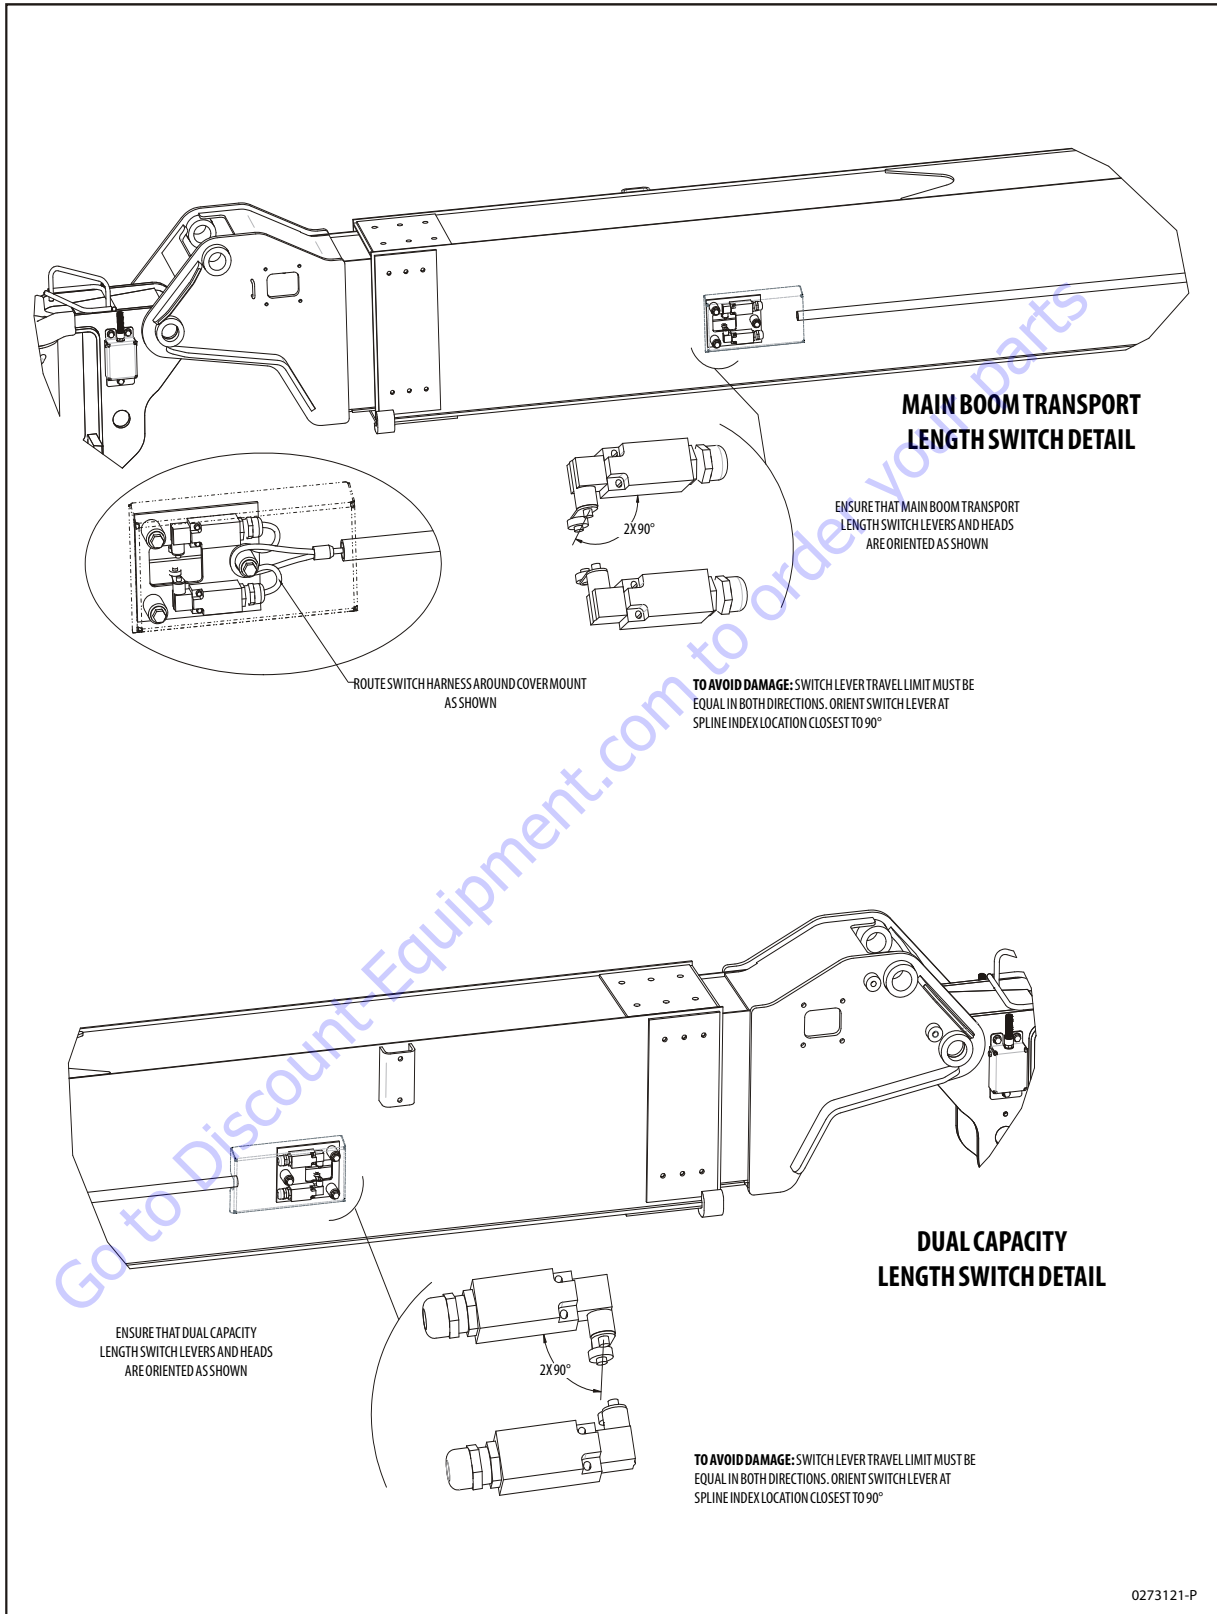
Boom Sensor Locations - Dual Capacity, Length, & Main Boom Transport
